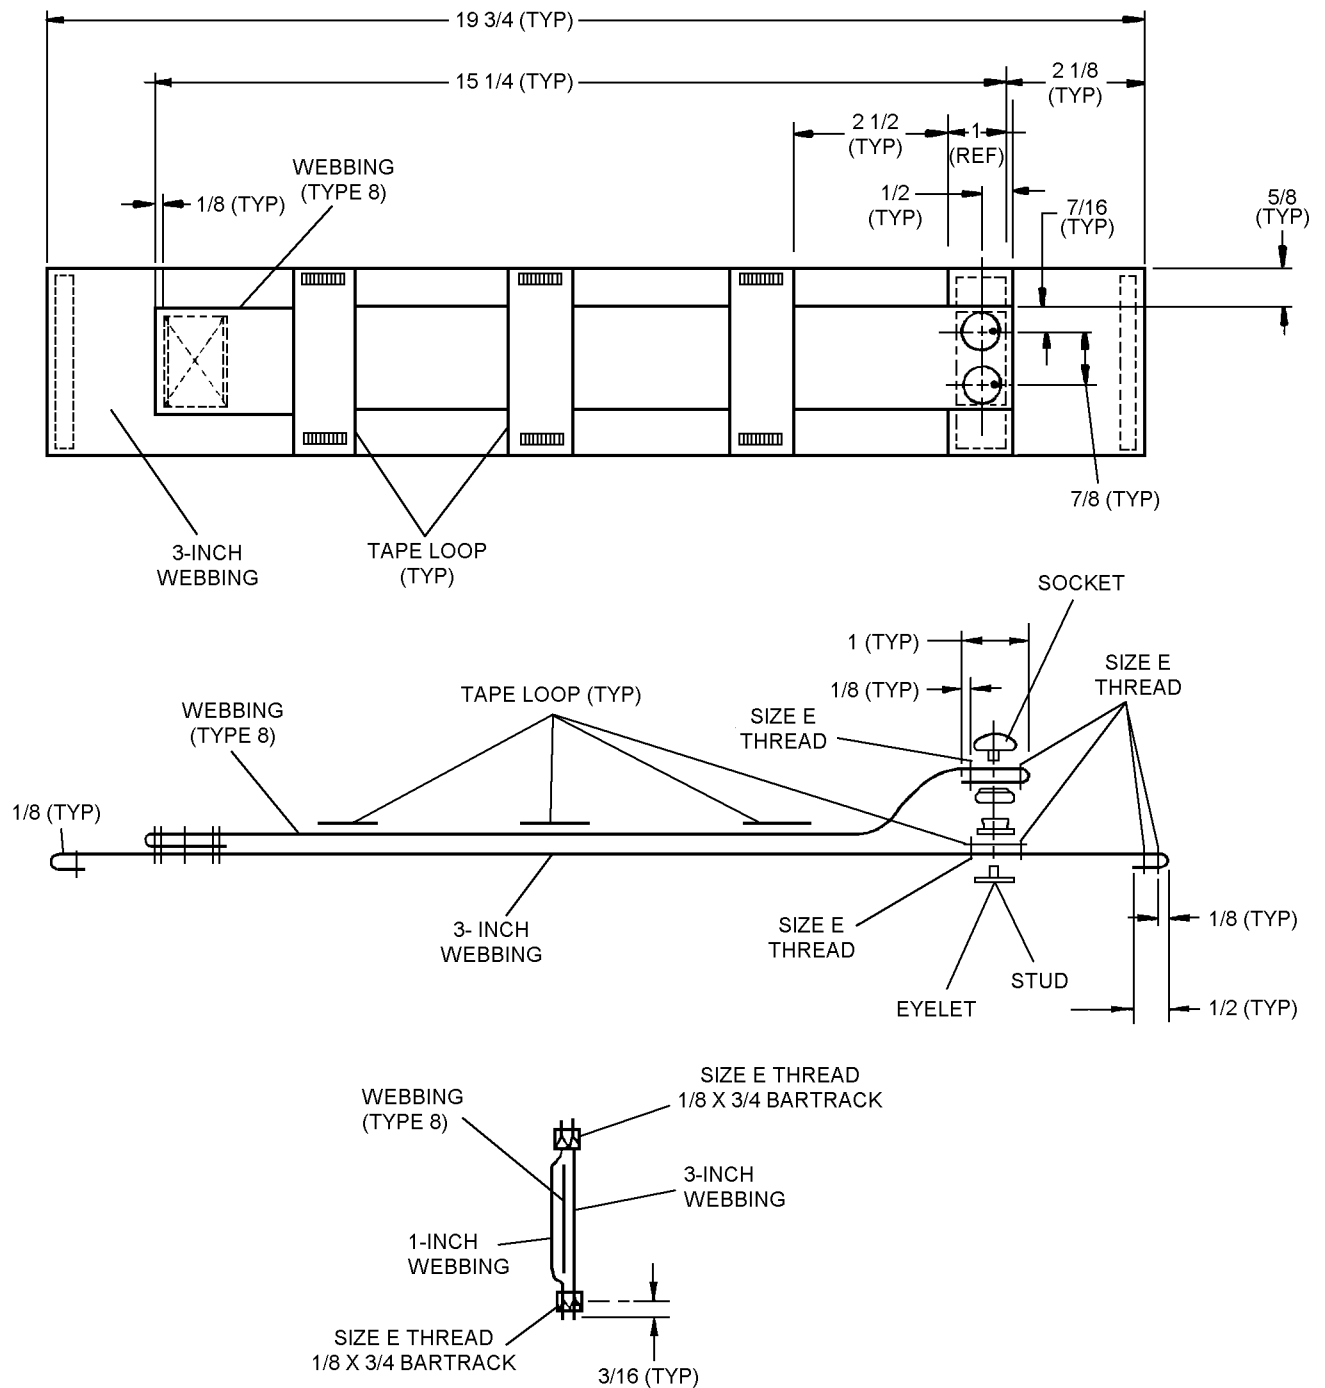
Survival Vest Securing (Waist) Belt Assembly
